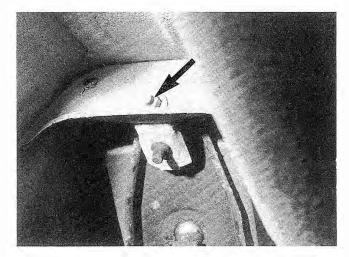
Shift console rear mounting nut to be removed (arrow). Model with sheet-metal console shown. Aluminum console is similar.
